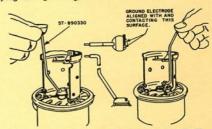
CHECK PLUG ALIGNMENT AND GAP
